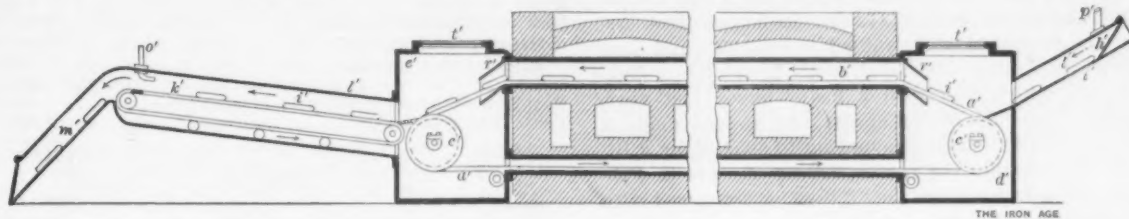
Longitudinal Section through Furnace for Annealing Iron and Steel Products.
